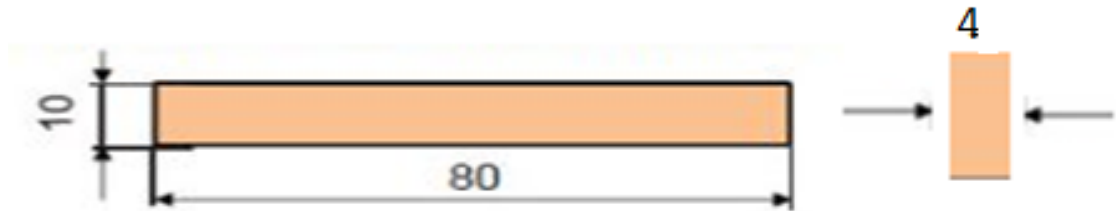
Flexural test specimen according to ISO 178 in mm and the dimension in mm
